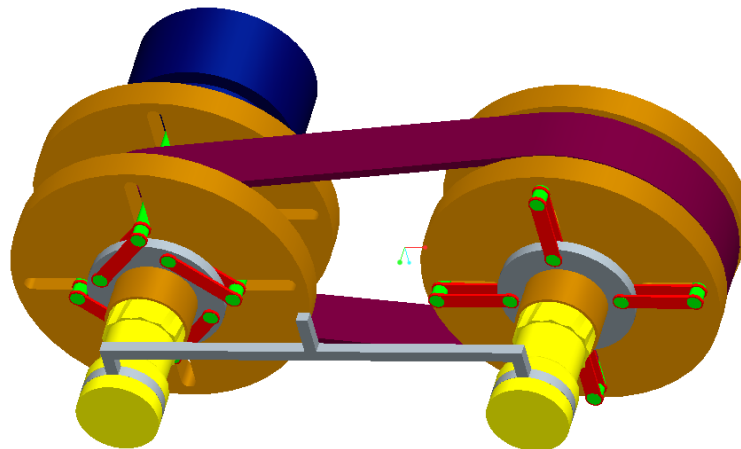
Assembly diagram of CVT system using spline equipped auxiliary disk and link
